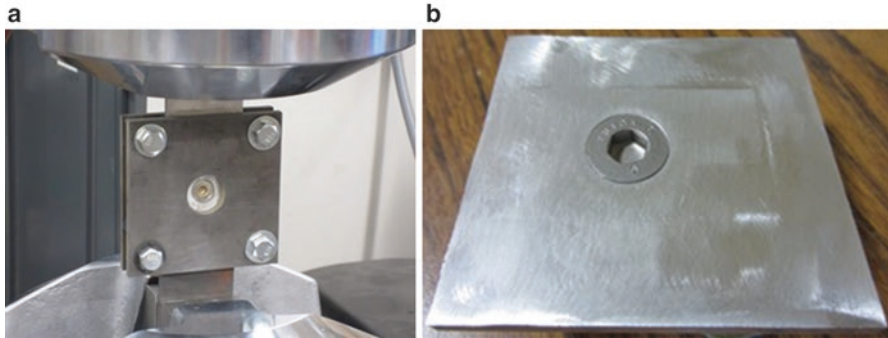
Test coupon with a fastener installed into a hole repaired by cold spray and inserted into a test fixture designed to test the cold spray repair simulating an actual FEB panel
